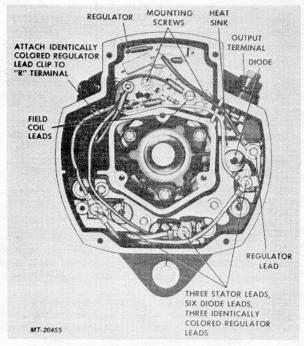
End View, Cover Removed (Discrete-Component 12-Volt Regulator)
